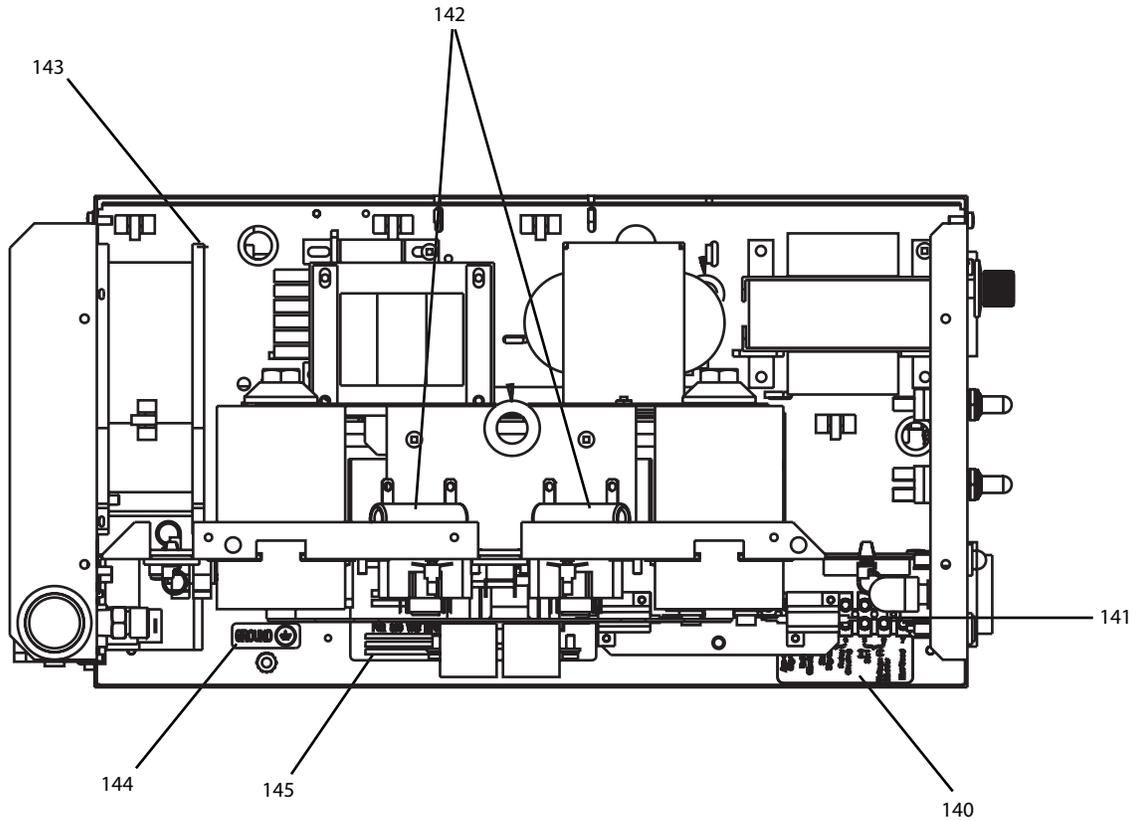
PCM-1125 Power Source, Top View with PCB1 and Shelf Removed
